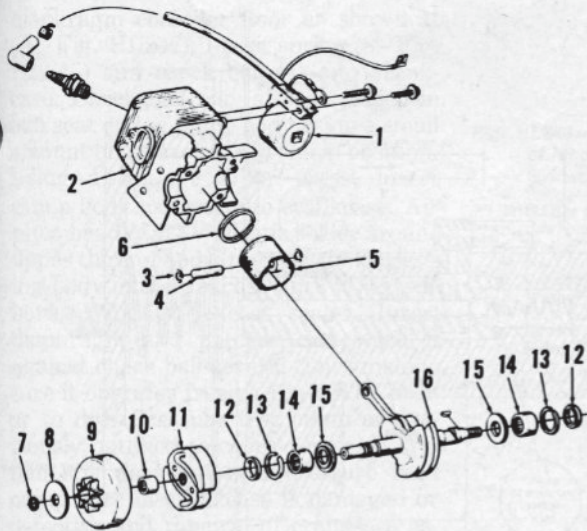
Exploded view of cylinder, crankshaft and clutch assemblies.
